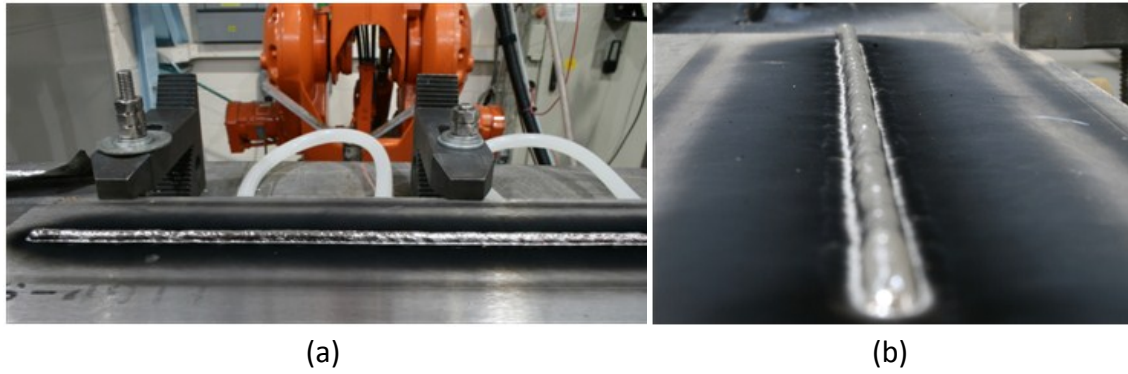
Single bead-on-plate Ti-6Al-4V deposited using CMT showing (a) side and (b) front views.
